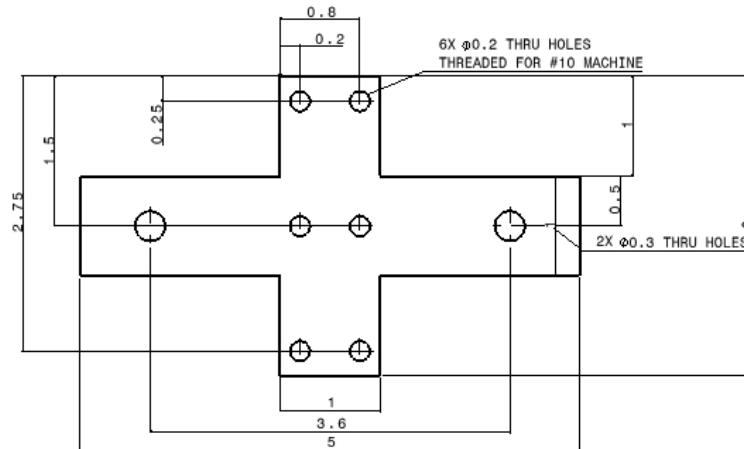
CATIA drawing of mounting plate specifications. All measurements are shown in inches.
